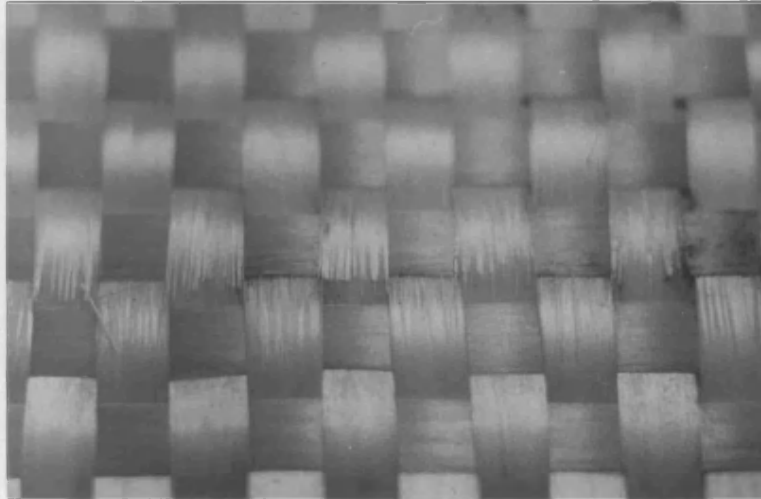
SCHEMATIC OF REINFORCEMENT DAMAGE AT POINT OF LEAKAGE IN OVERLOADED PIPE WALL.
